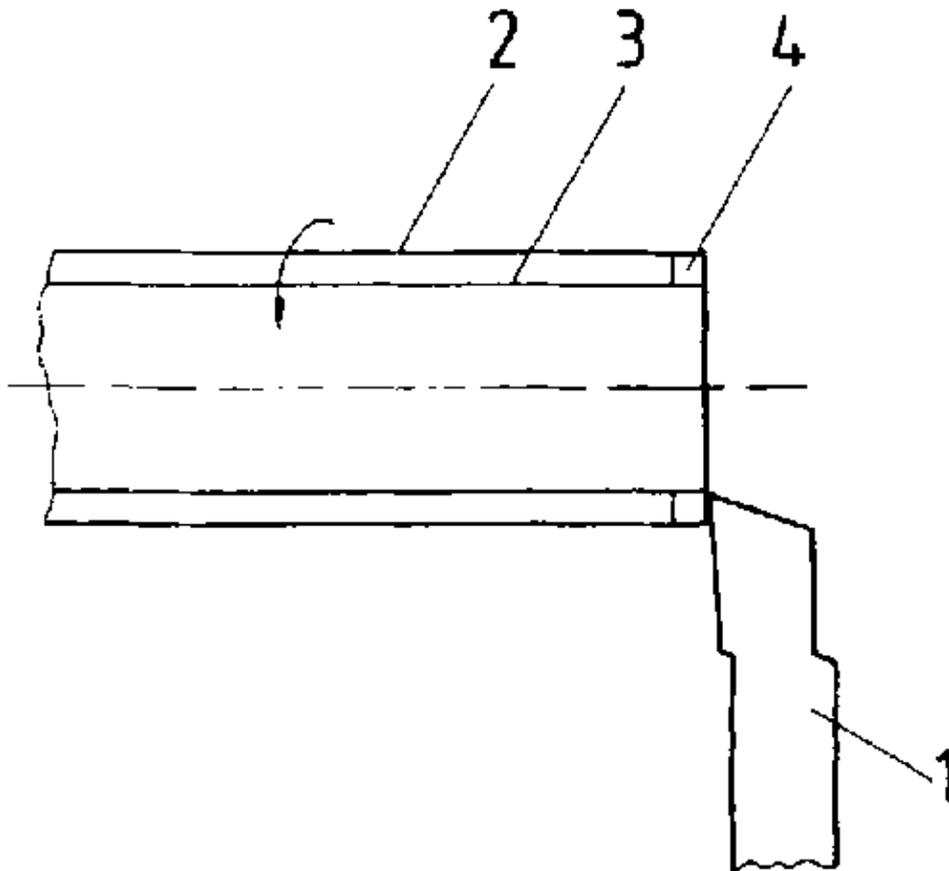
Starting the cut at the workpiece for dimensional inspection
